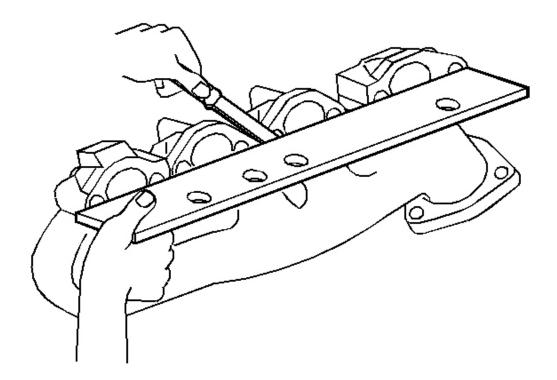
Measuring Exhaust Manifold To Cylinder Head Surface For Warpage Courtesy of GENERAL MOTORS CORP.
